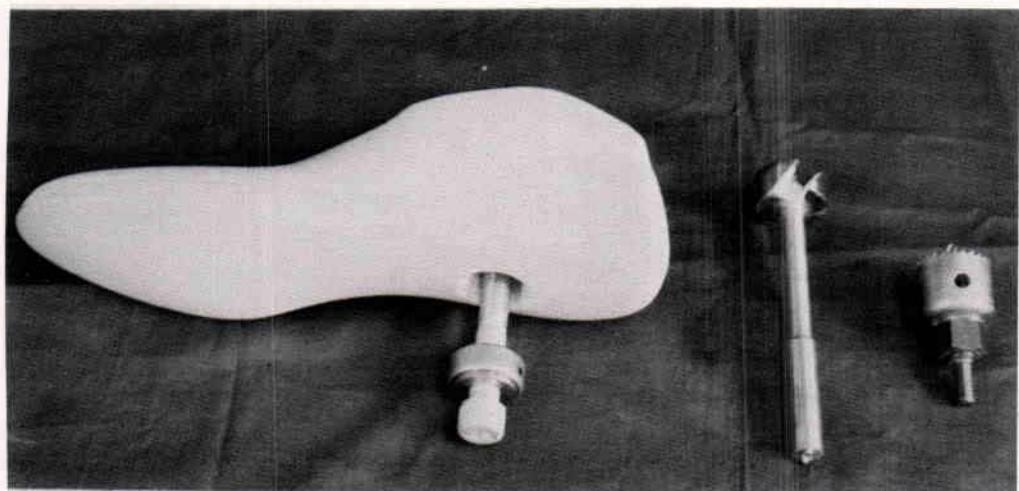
The hole in the bottom of the SACH foot is enlarged to accept the bearing of the rotator.
